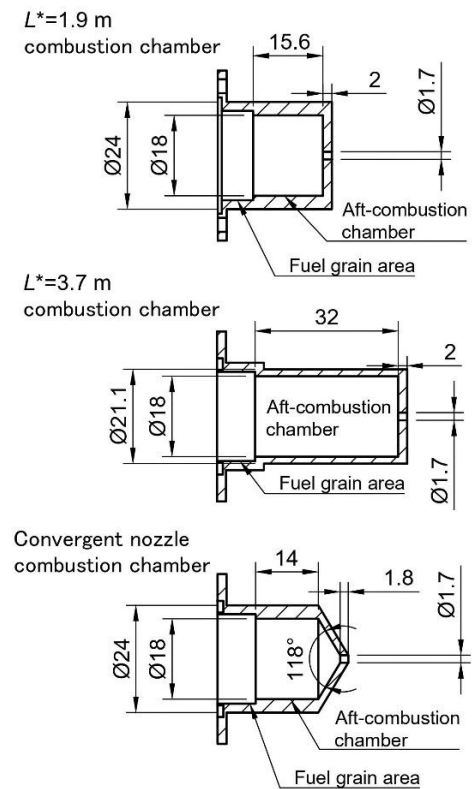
Cross-sectional views of the three types of combustion chambers.
